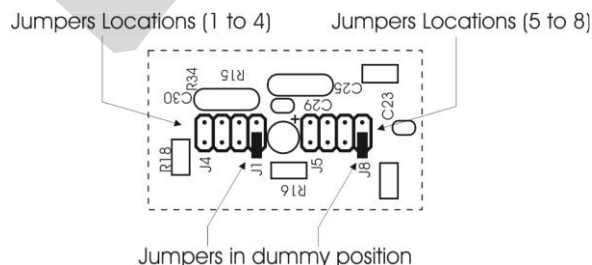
Jumpers not used for 0 to 10V input placed in the board connector
